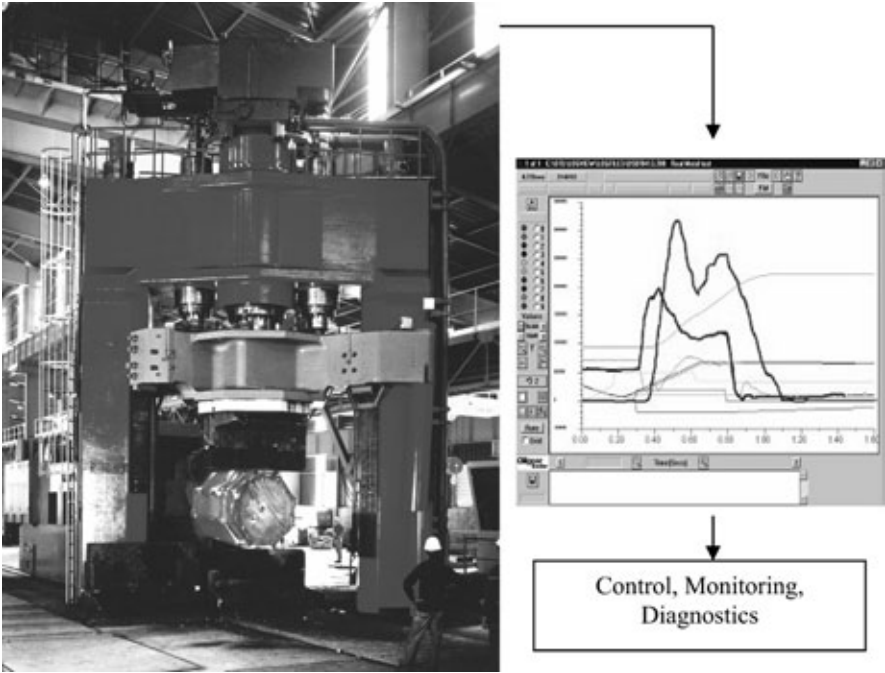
Forging press system (Courtesy of The Oilgear Company)
